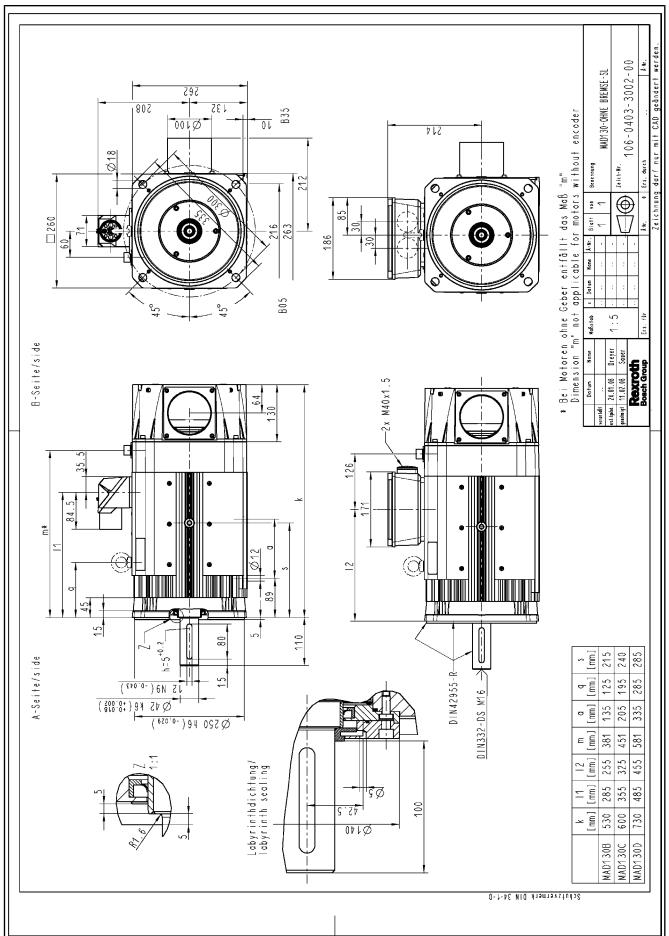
Dimension sheet MAD130 with brake 1/5
